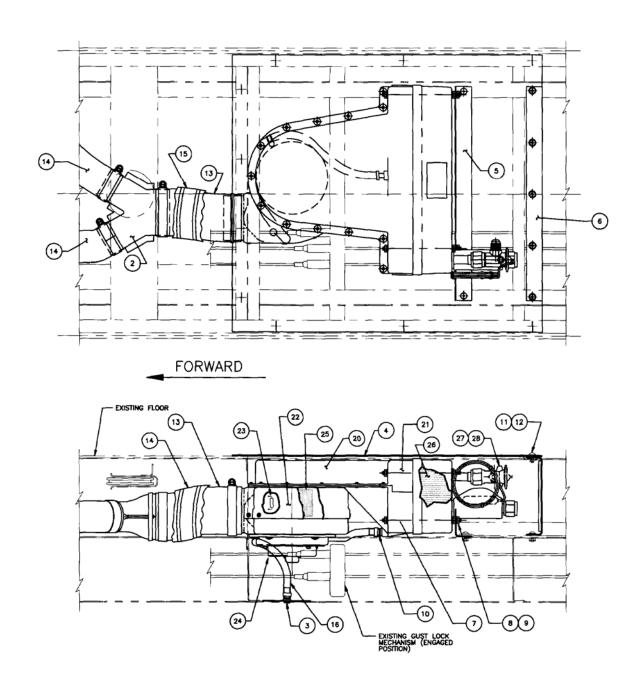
FWD Evaporator Assembly (Cool Stick Option)
